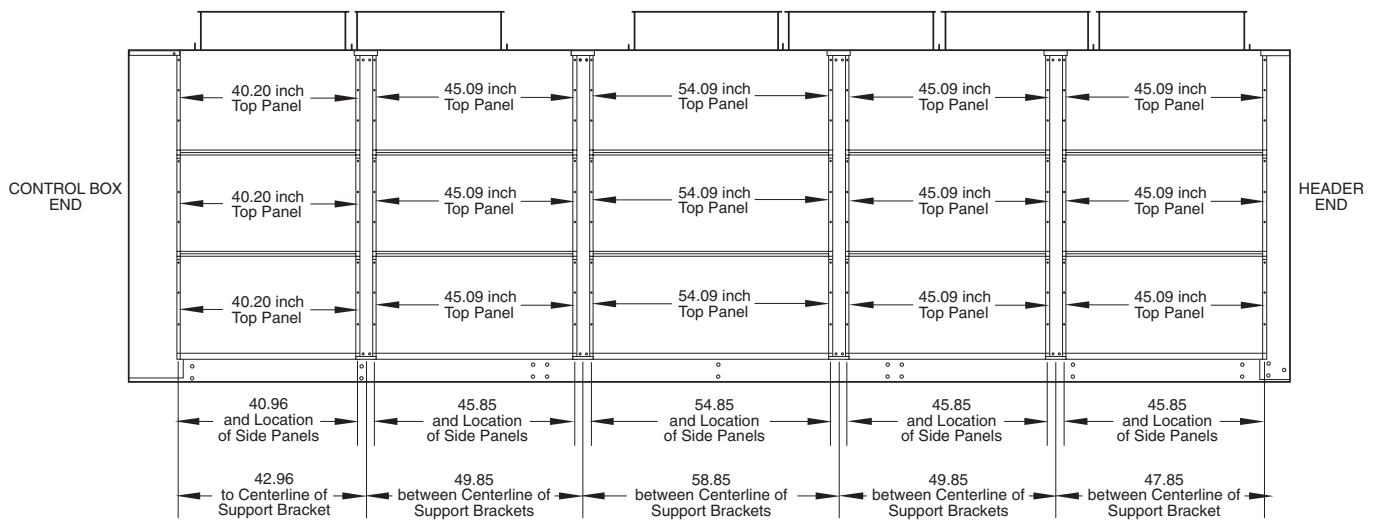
D — Unit Assembly, 30GXN,R153,174,175,204,205,225 and Associated Modular Units — Both Sides
